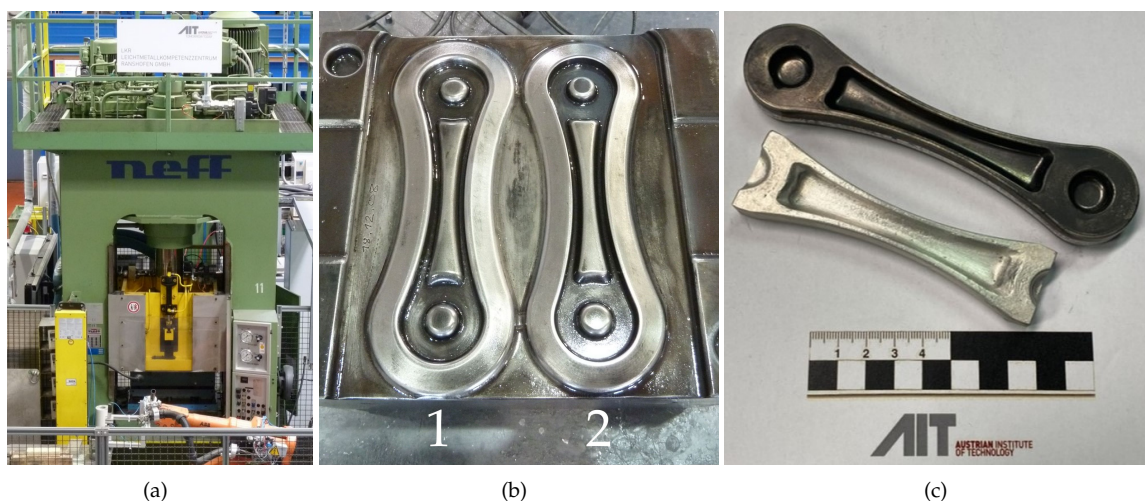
Pictures of (a) the used hydraulic 160 t forming press (DZP 160, Walter Neff Maschinenbau GmbH), (b) forging die, with numbers indicating forming steps, (c) full length and shortened piston rods as produced in the laboratory forgings.
